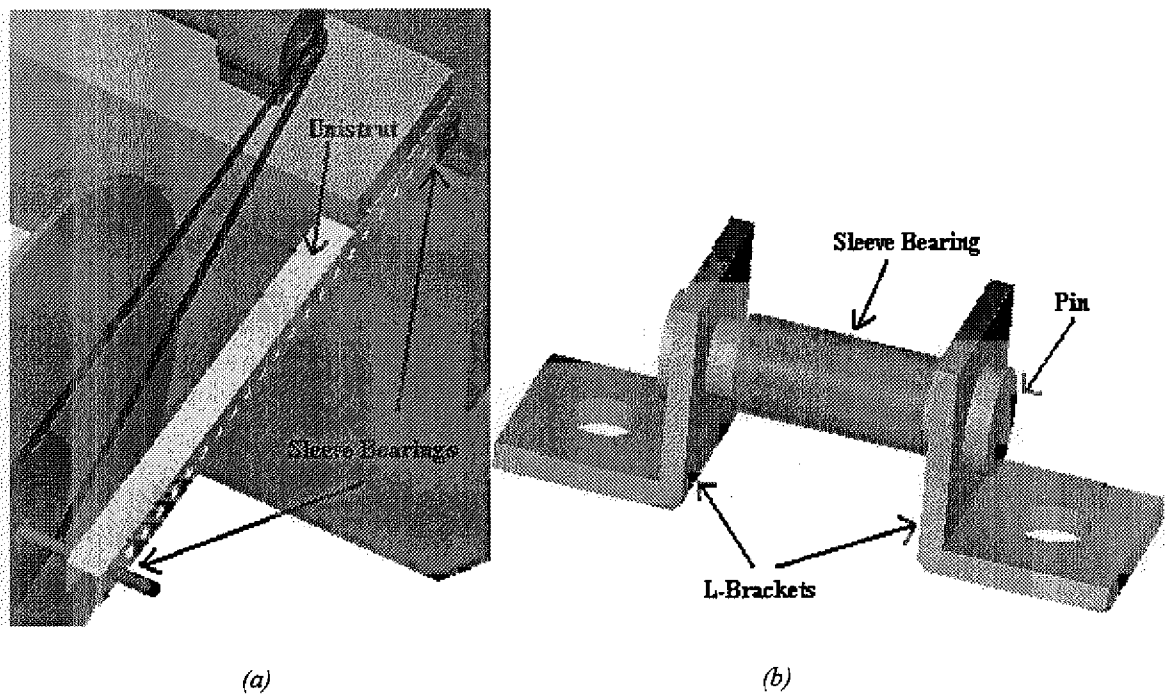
(a) Swing arm joints, (b) paddle wheel pivot point
